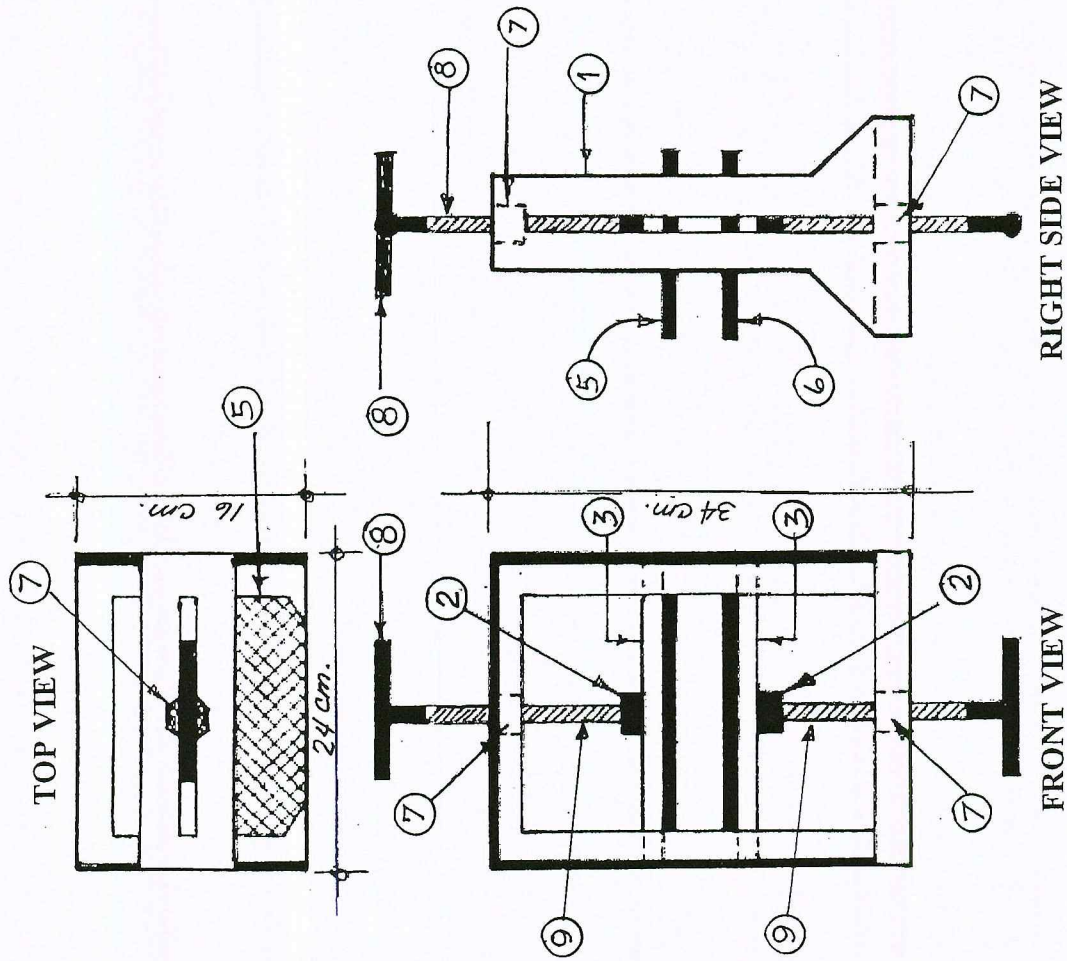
MULTI - PURPOSE CLAMP ASSEMBLY
